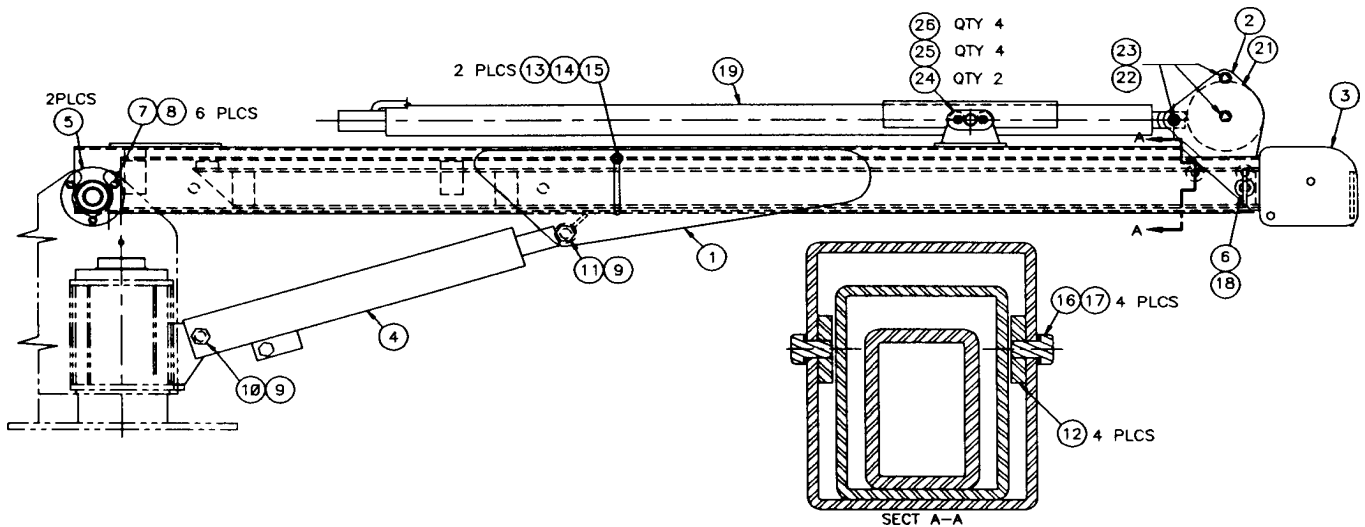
BOOM ASM-11' VERSION W/HYD EXT (41711164)
